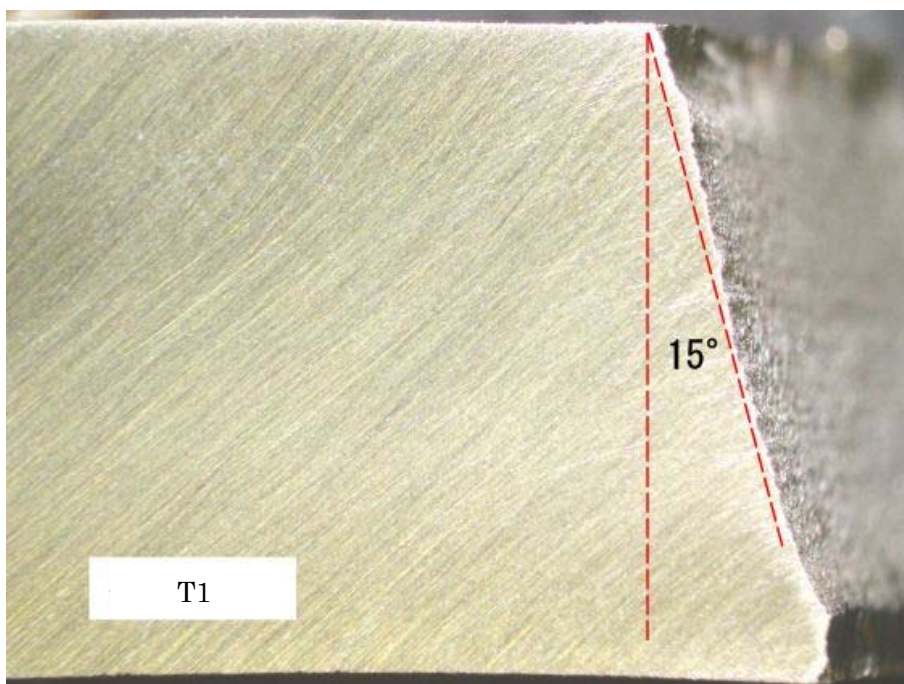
Cross-section of fracture specimen1 (T1).
